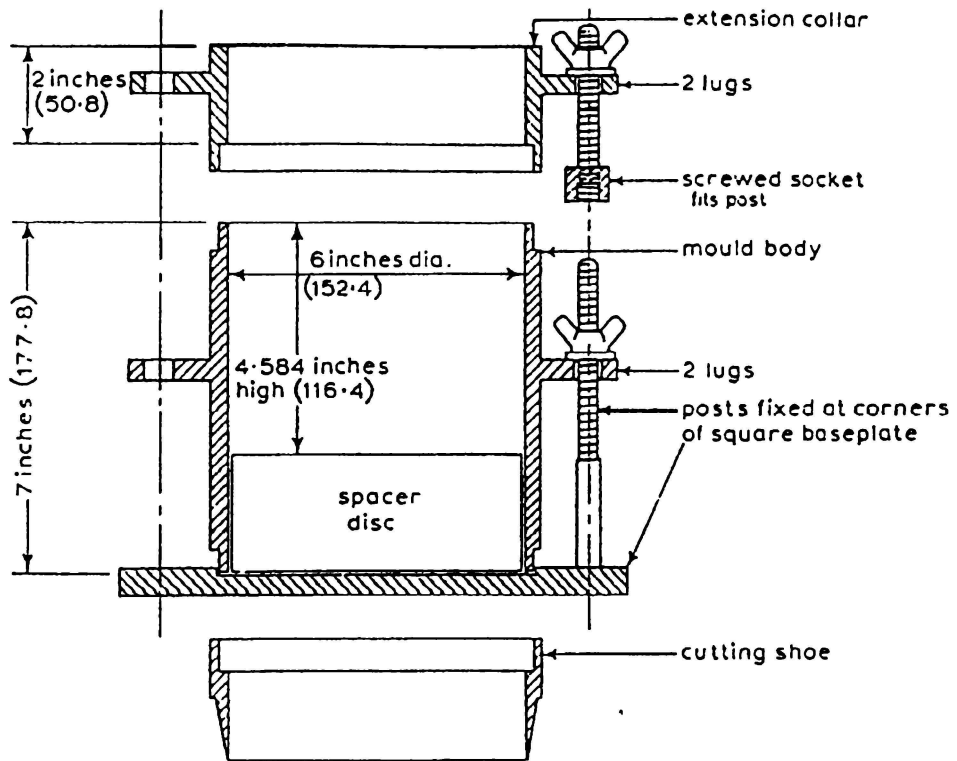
Arrangement of CBR mould and fittings (ASTM type) (dimensions in brackets are mm)
